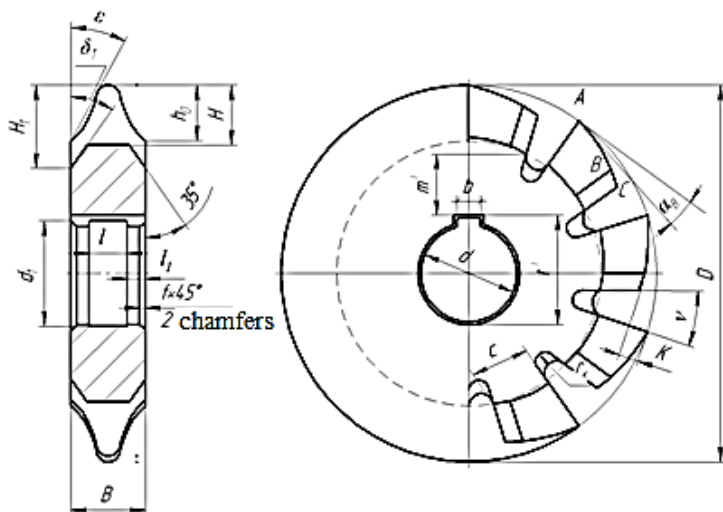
The main parameters of the interlocking disk milling cutter
